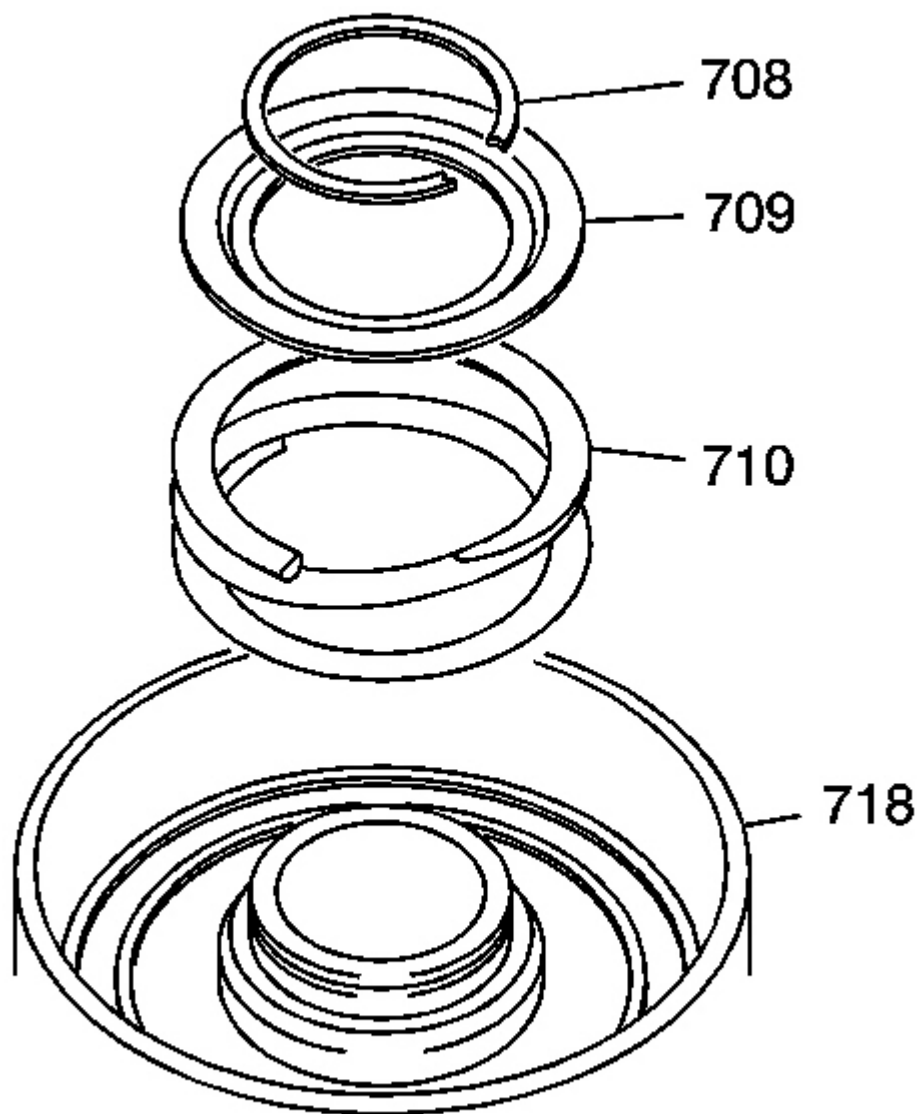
Retaining Ring, Return Spring Cap & Clutch Return Spring Removed
